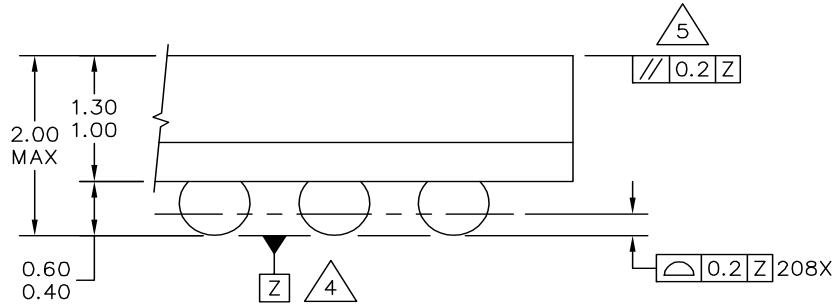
208 MAPBGA package mechanical drawing (part 1)
